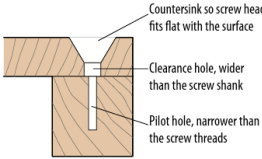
Drilling timber parts ready for a countersunk screw
